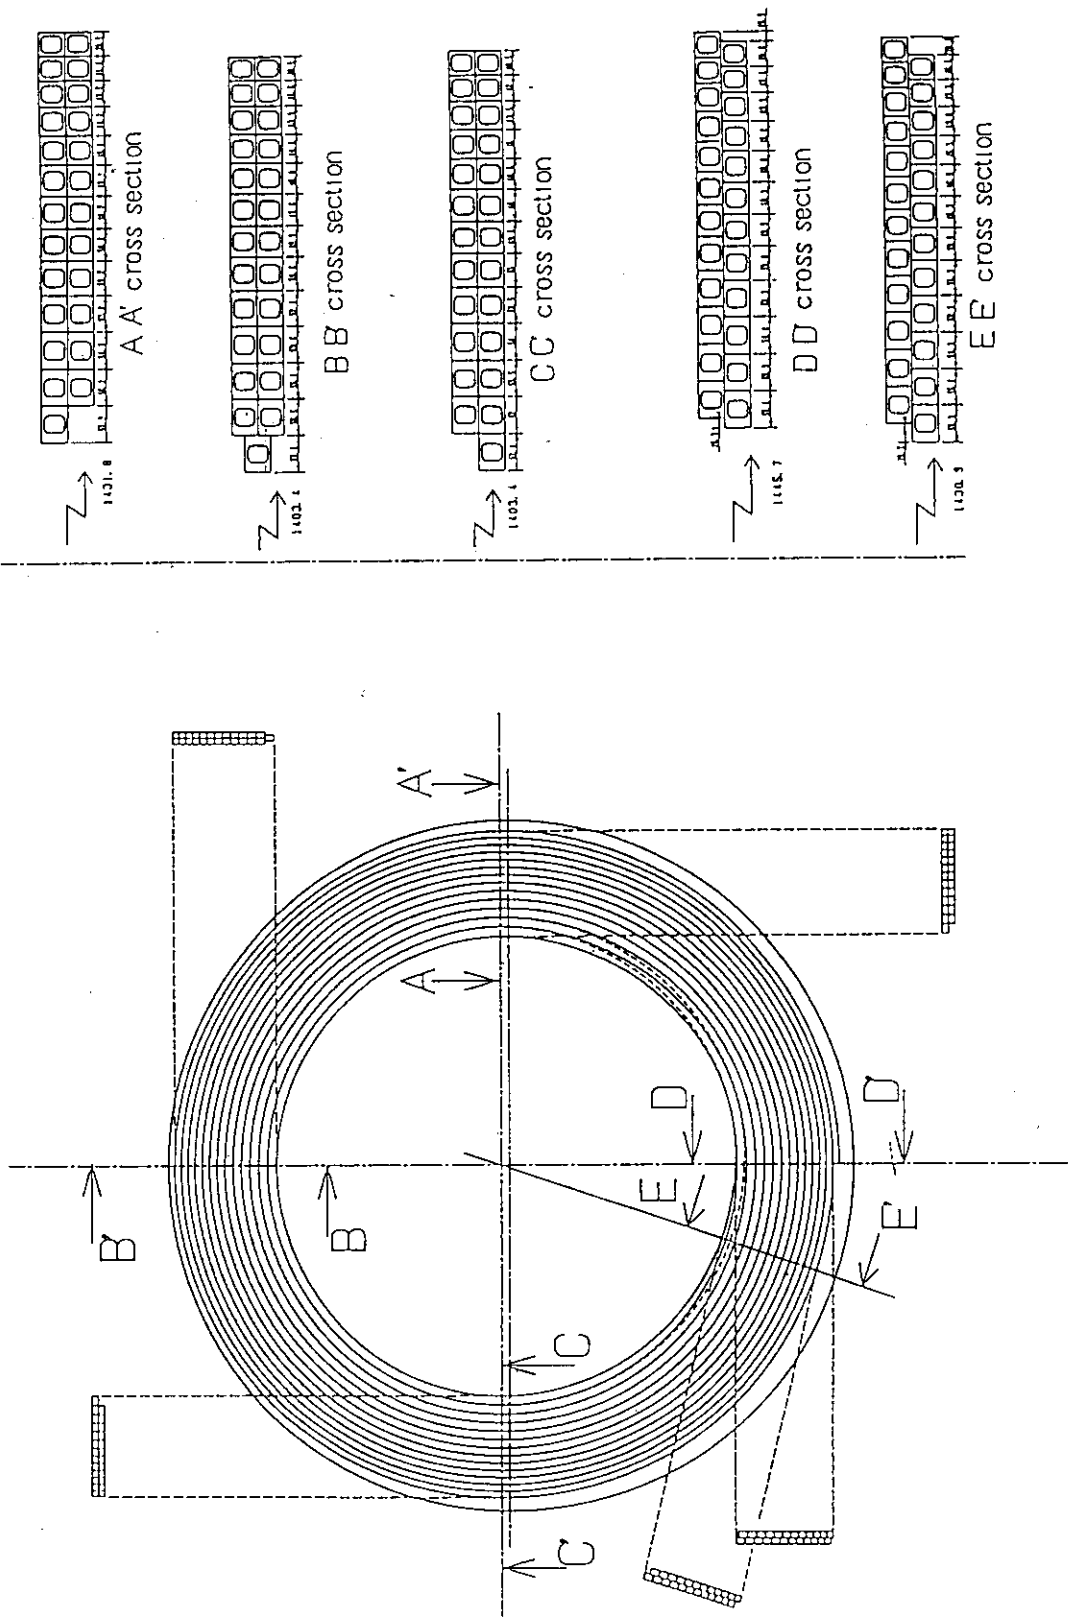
Winding layout and the cross section of the several parts of the one double pancake.
